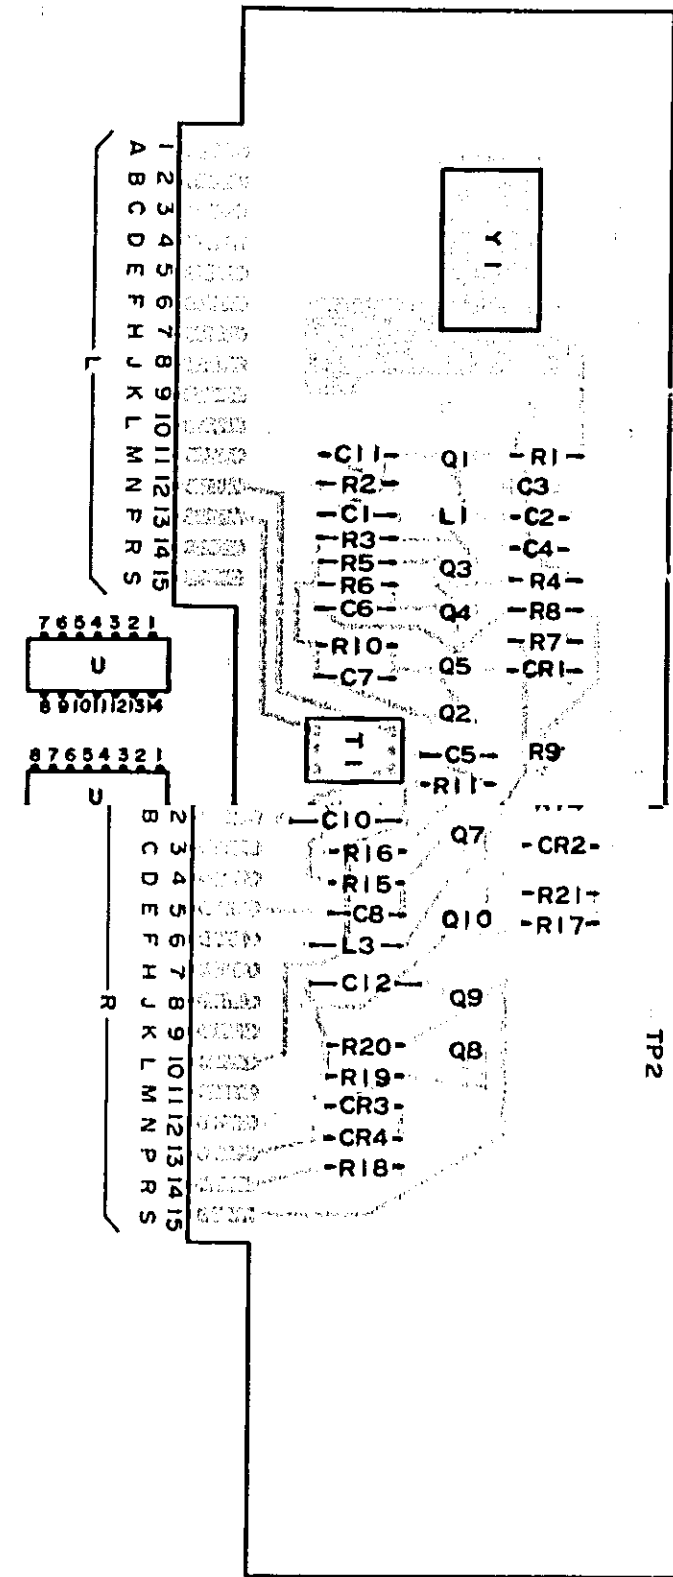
A4 Oscillator Board Assembly Component Locations.
